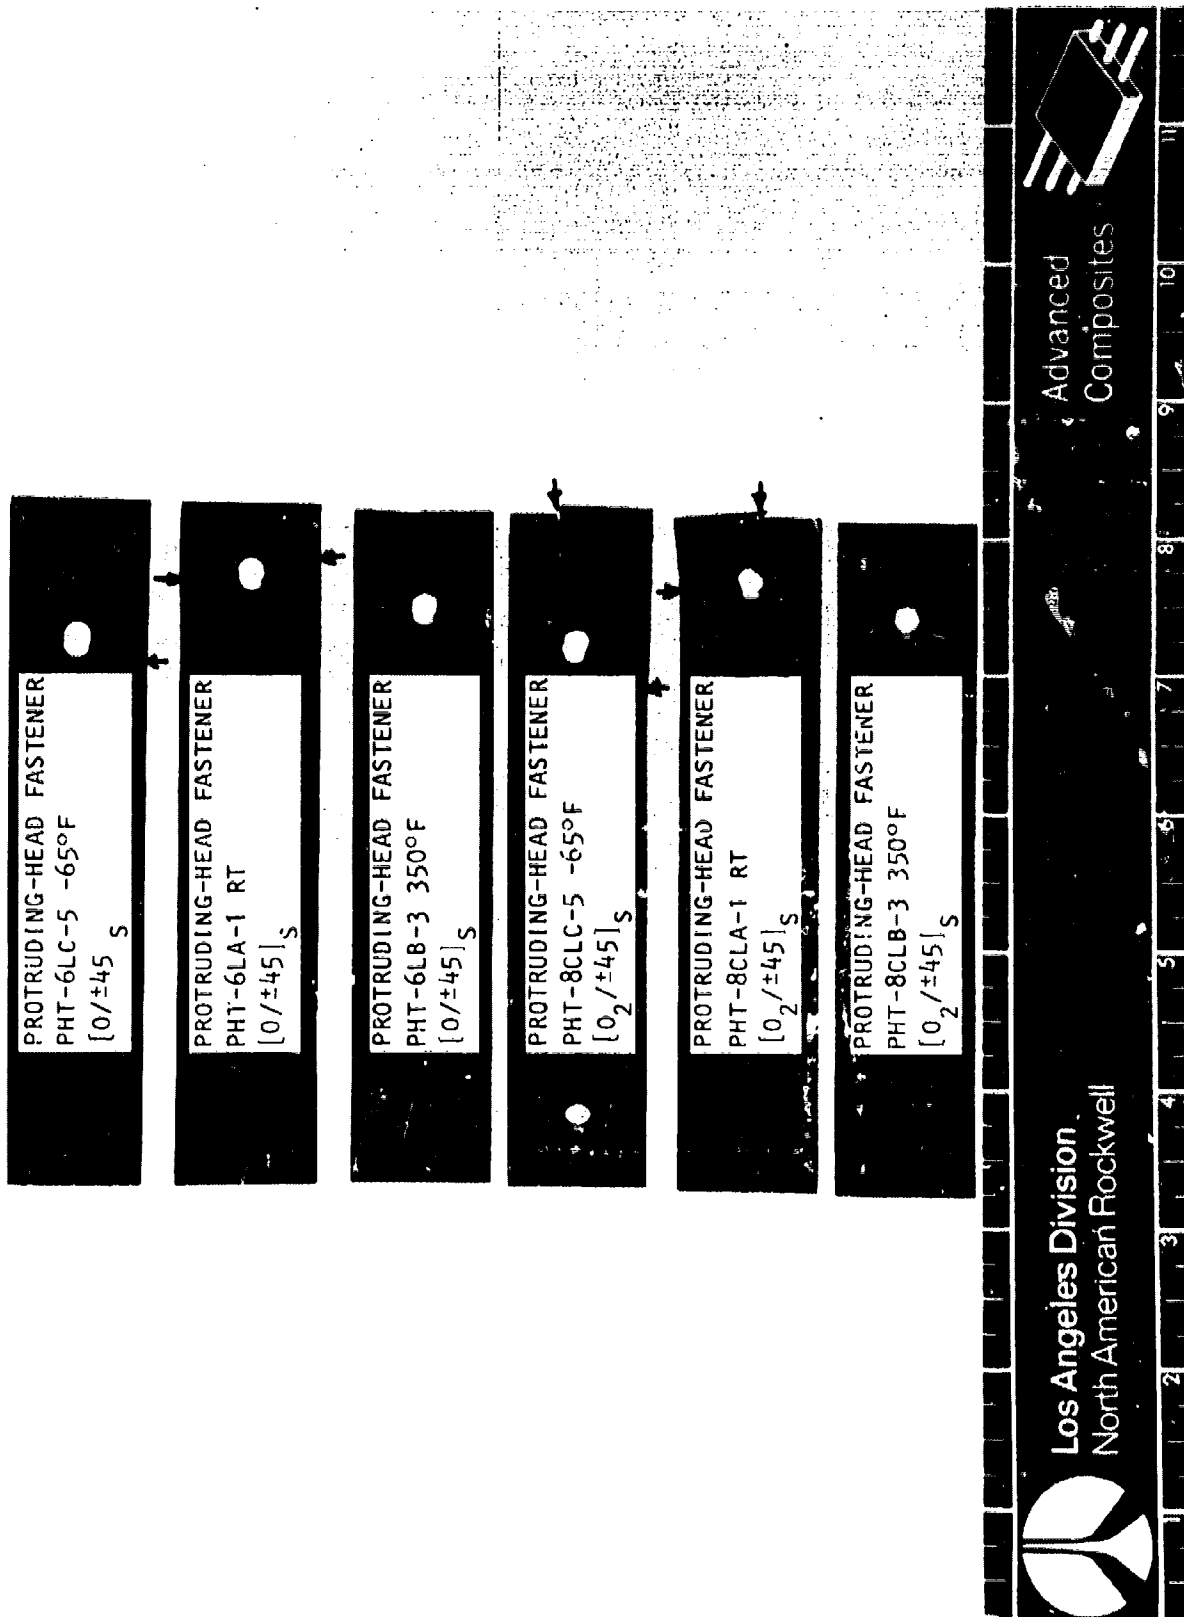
Typical Failed Protruding Head Single Lap Graphite/Epoxy (Type AS/5002, Batch) to Steel Mechanical Joints
